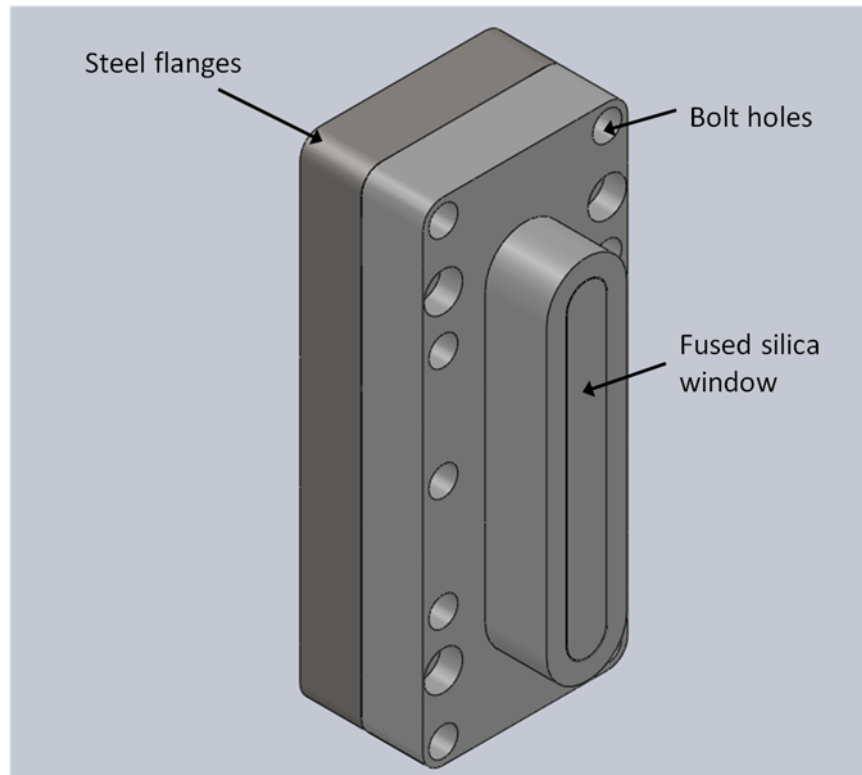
Solidworks model of laser window in the bottom flange of the shock tube.
